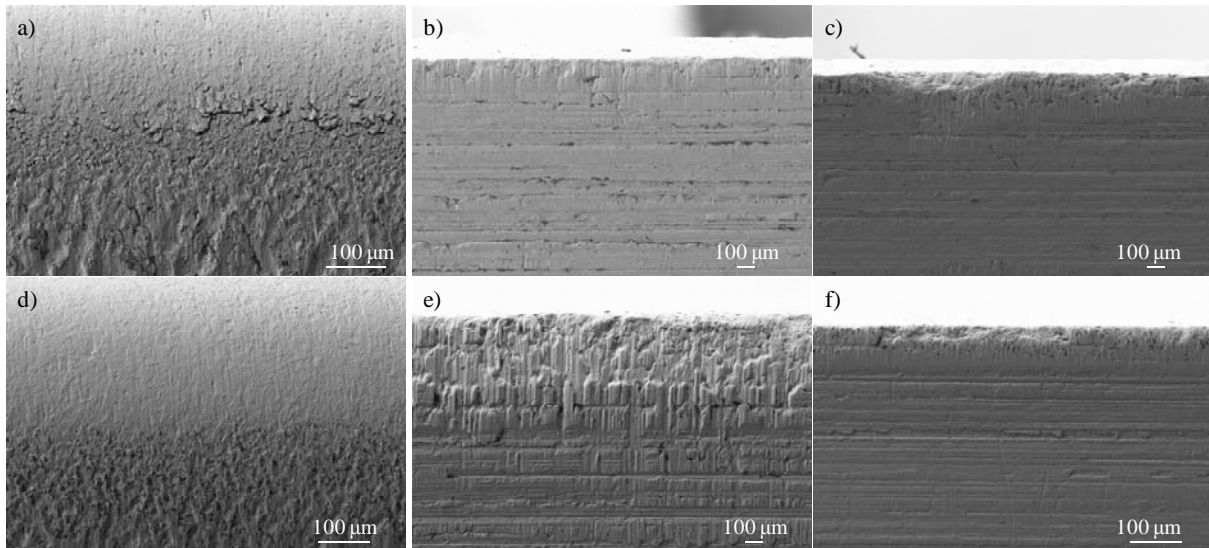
Fractography of the upper 1.2379 tools: a) and d) flank face of the tool with radius 500 μm after 22000 strokes; b) and e) flank face of the tool with radius 10 μm after 8000 strokes and c) and f) flank face of the tool with radius 10 μm after 22000 strokes
